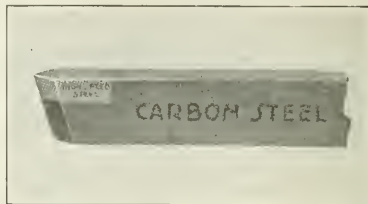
LATHE TOOL WITH CUTTING POINT OF HIGH SPEED STEEL
